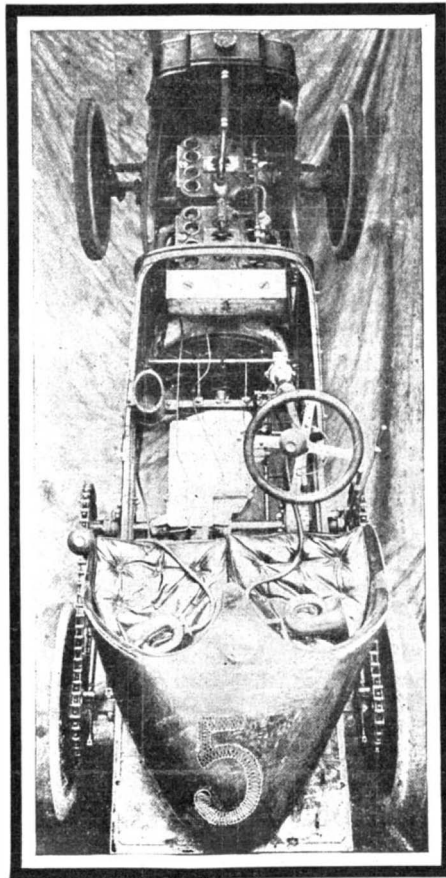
UPPER SIDE OF THE CHASSIS.
